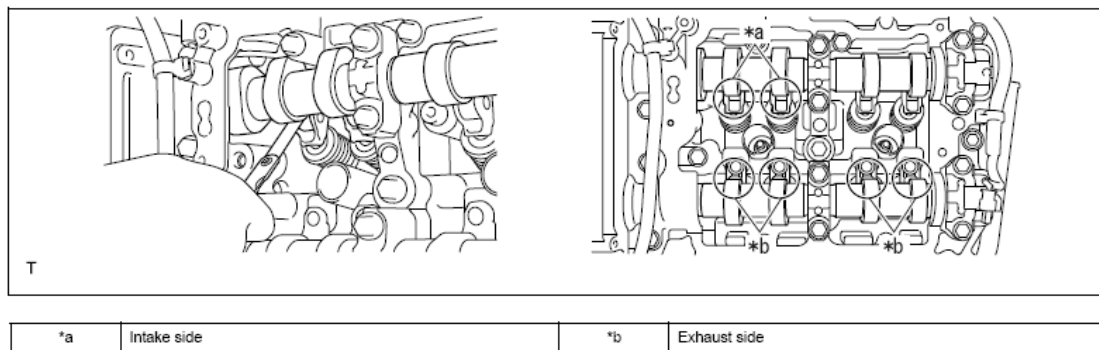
Measuring Intake And Exhaust Side Cam Clearance
